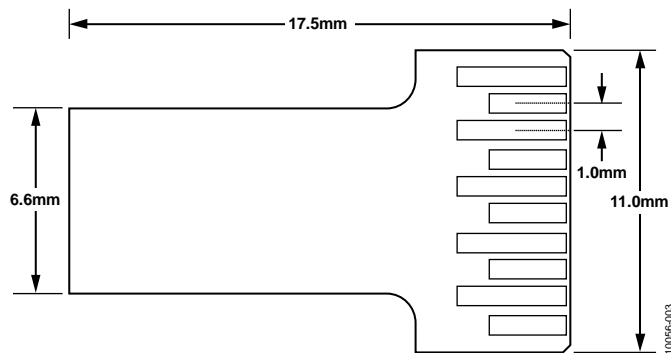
Evaluation Board Dimensions in Millimeters (Wires Not Included)
